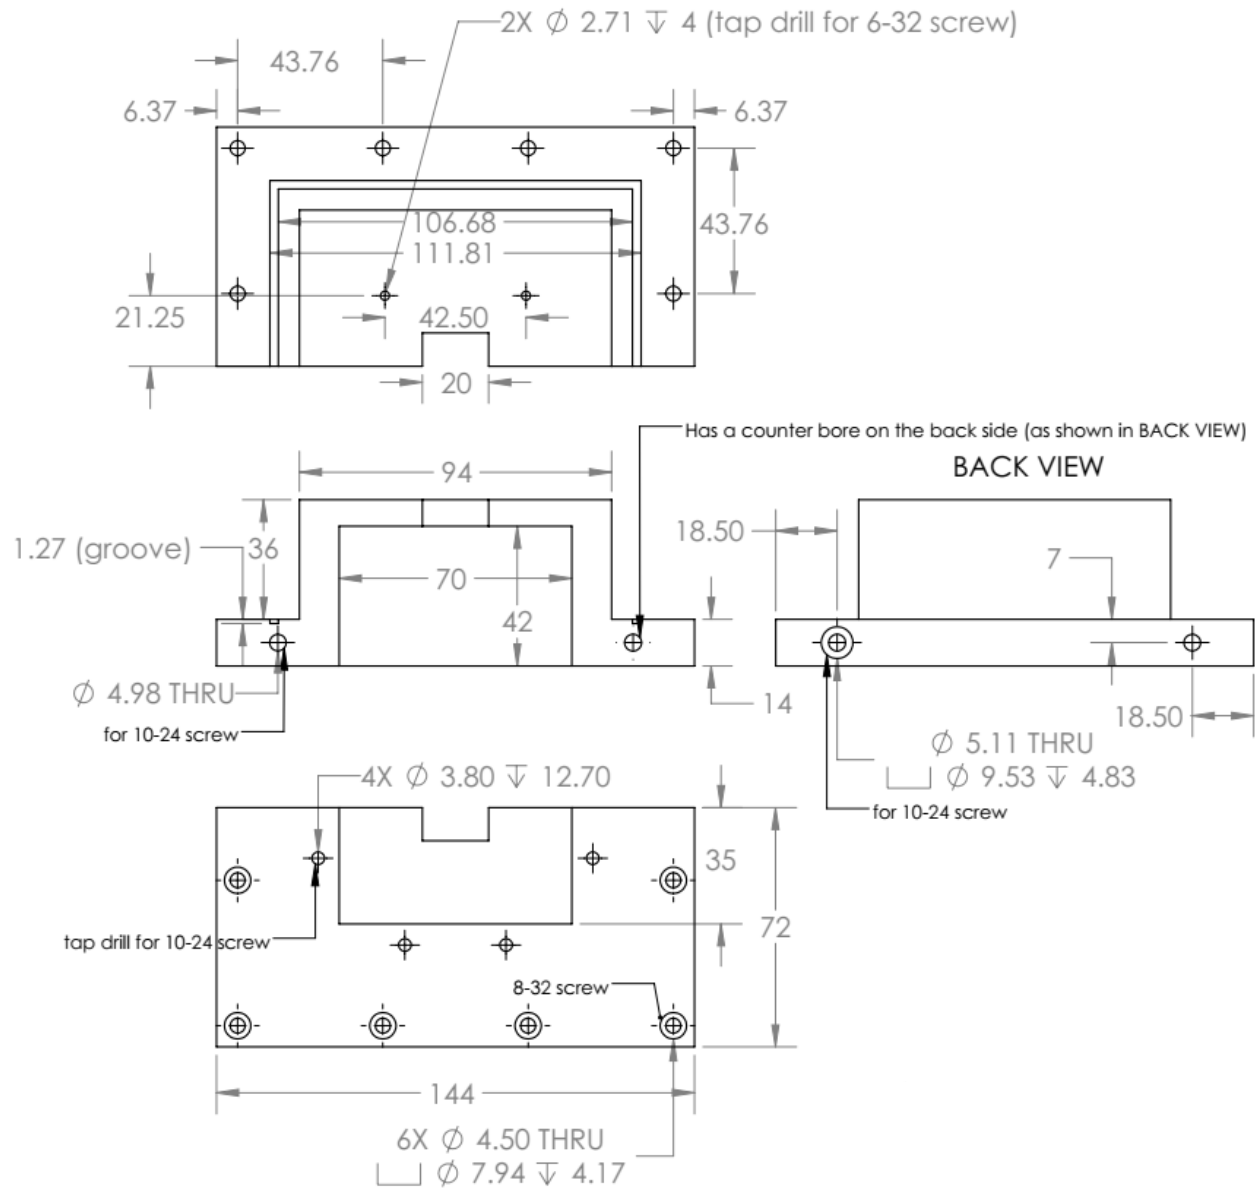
Technical drawings of the fixture that is used to seal the heater block/wick assembly into the test facility. All dimensions are in millimeters.
